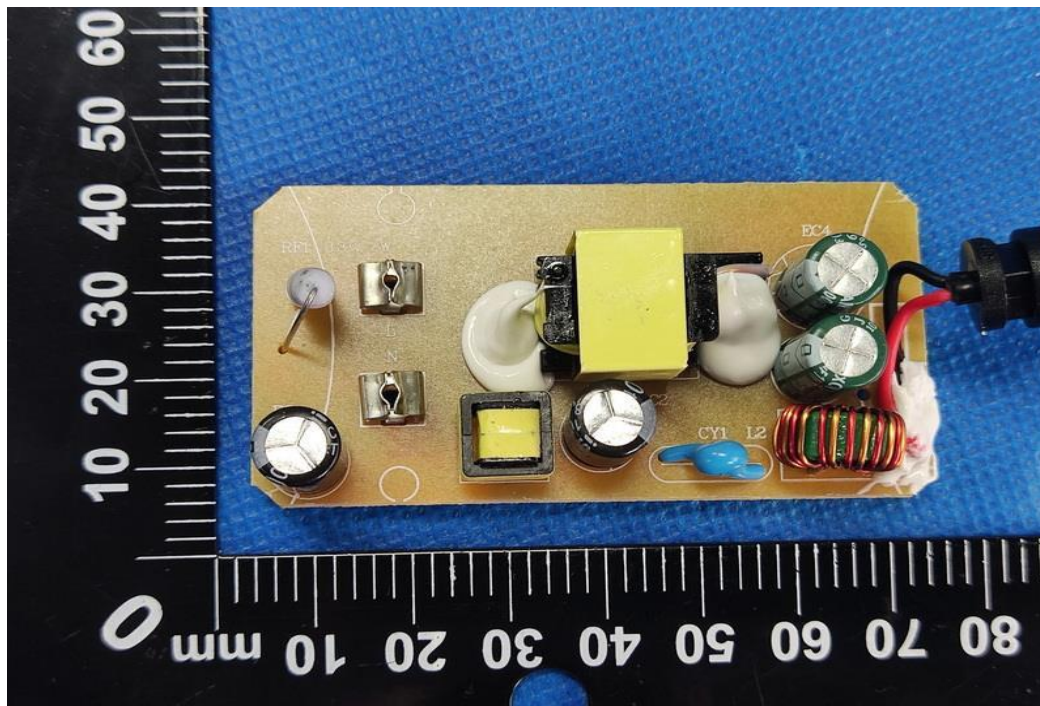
PCB view with L2, for PCB layout PCB-T985 (Line choke L1: 0501-0027)
